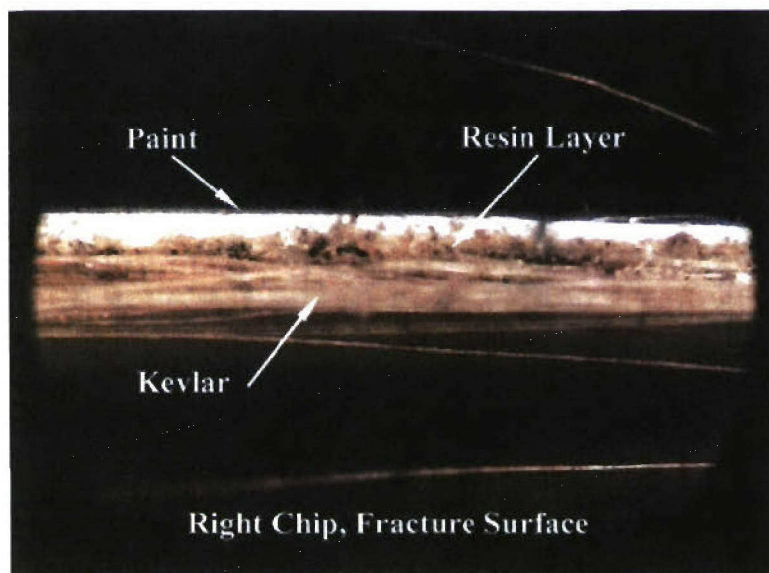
Fracture Surface of Right Chip (26X Magnification).
